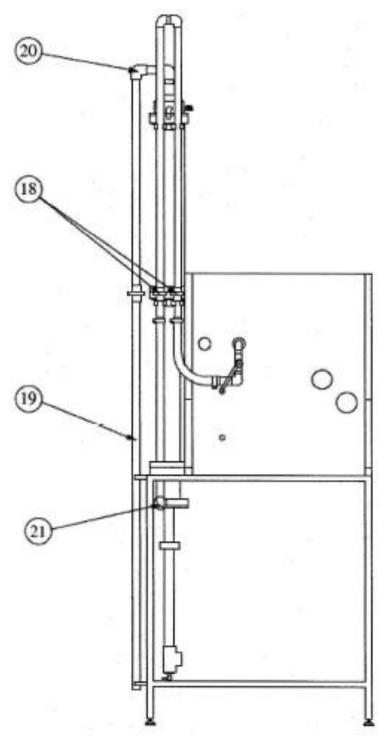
Diagram showing details of the overflow arrangement and air pipework.
